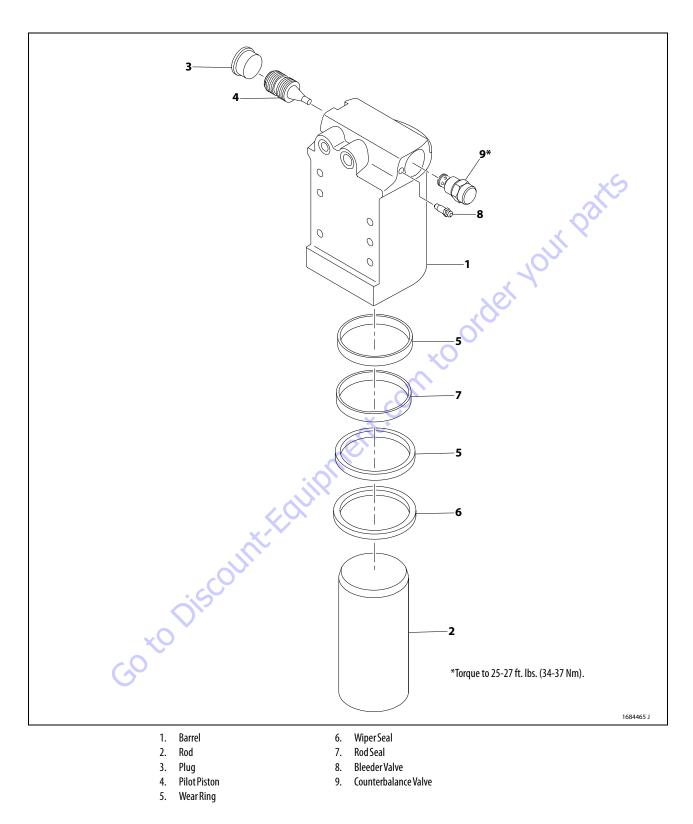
Axle Lockout Cylinder (USA Built Machines, SN 0300089729 through 0300171769 and China Built Machines, SN B300000100 through B300000969)
